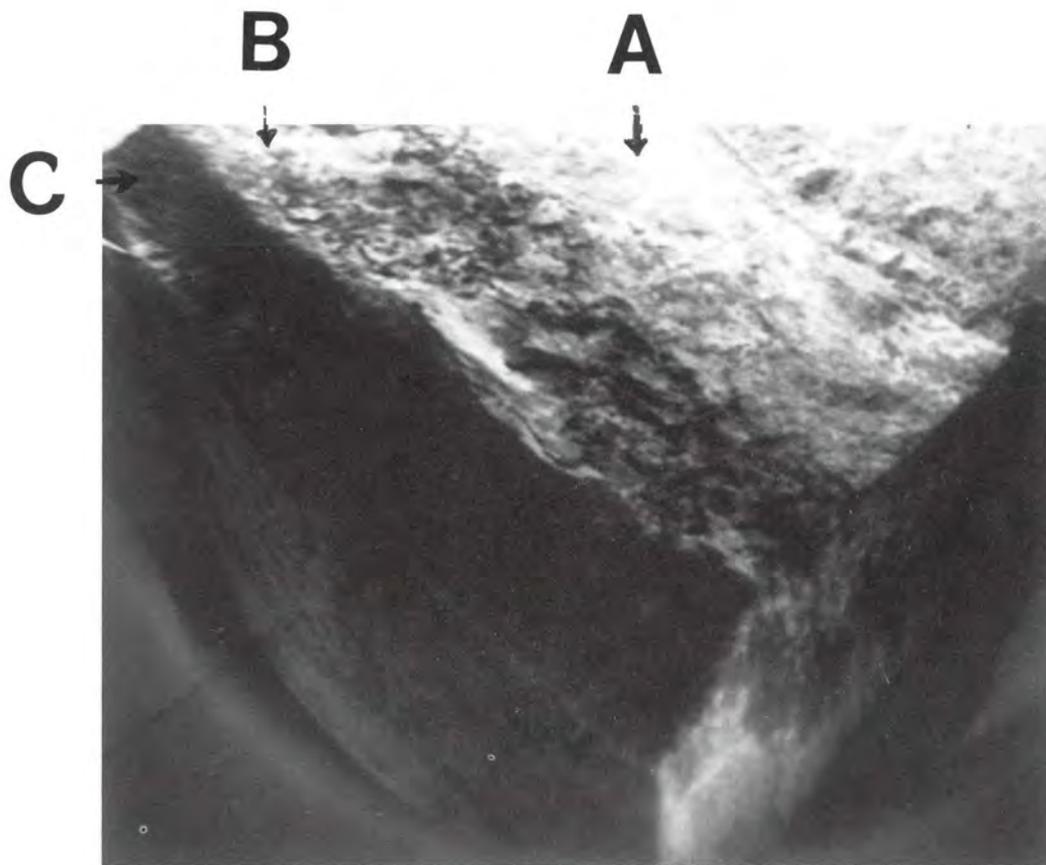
Scanning electron microscope photograph showing the crack surface from the full pin. The rounded area, in the foreground and toward the left side of the photograph, is corrosion pit; the next area is a fracture surface caused by the corrosion crack; and the final area, toward the upper right-hand corner of the photograph, is a fresh fracture caused during the preparation of the sample. x5.
